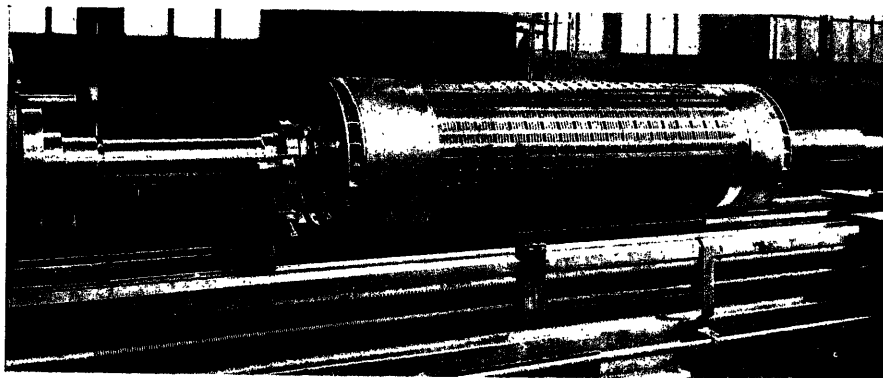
Rotor for turbogenerator 8,750 kVA, 3,000 r.p.m. built in 1915.
